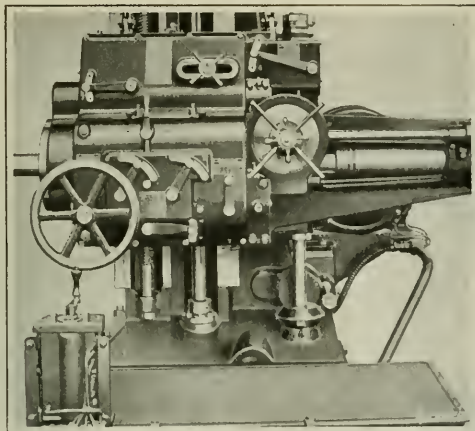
Close-up View showing the Operating Levers arranged on the Saddle within a 42-inch Circle
